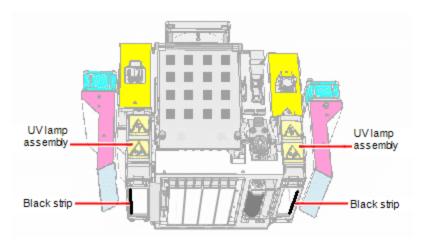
Print block and UV lamp assembly, showing correct placement of black strip
